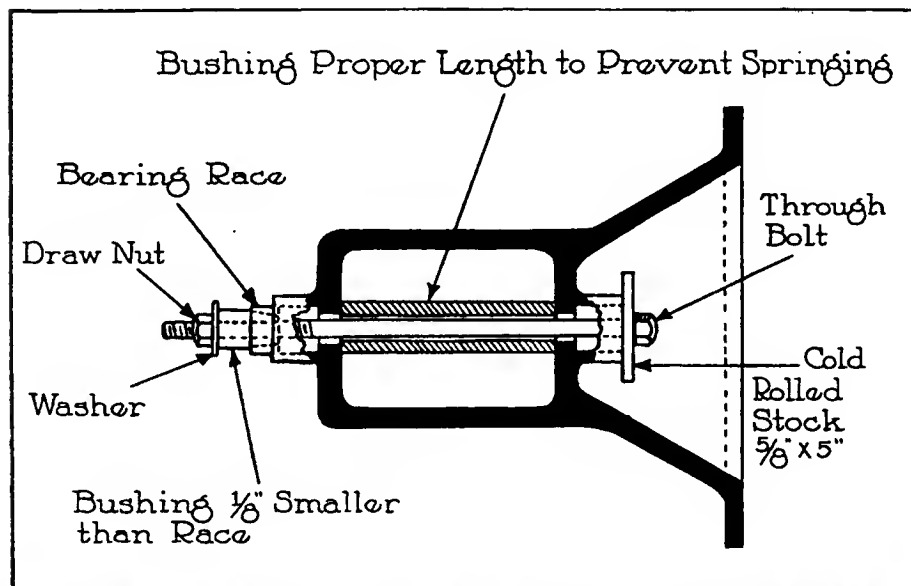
Light and Fragile Castings Must Be Braced to Prevent Breaking or Springing When Bearing Race Is Being Drawn Properly to Seating Position.
